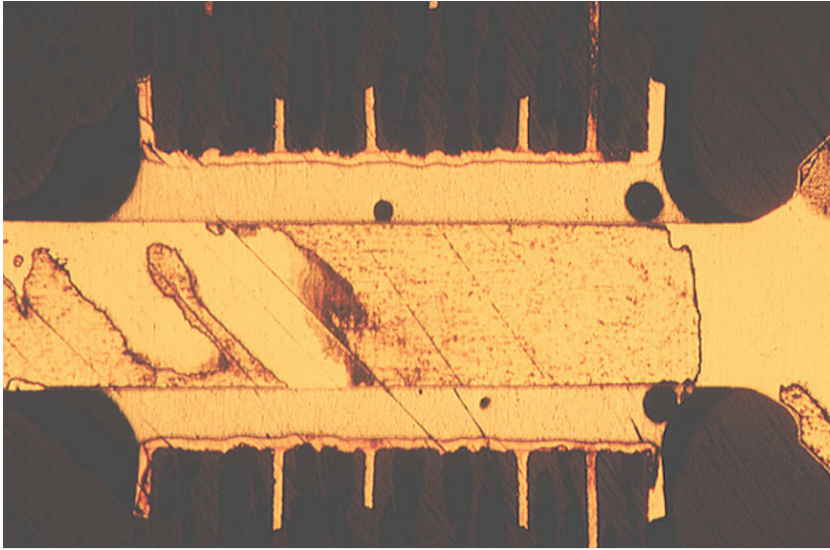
Microsection showing a satisfactory through-hole joint on a six-layer board with minor voiding. Solder fill after reflow of the paste is greater than 100%. The hole-to-lead ratio is quite large. If this were optimised with the same process parameters, it would result in positive solder fillets. This example exceeds the IPC 610E requirements.
